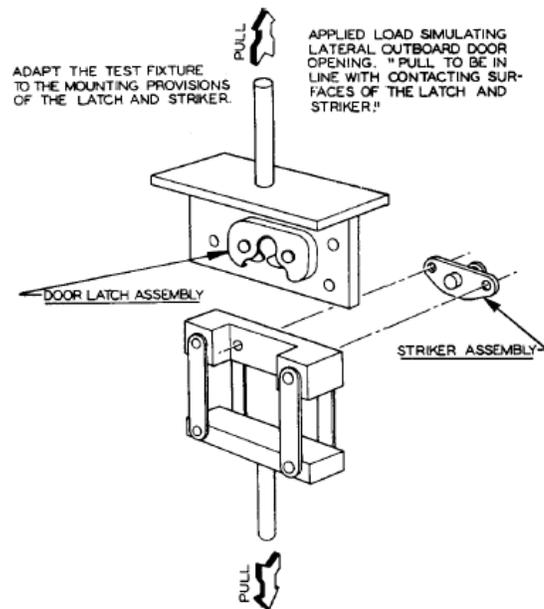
Door Latch – Tensile Testing Fixture for Load Test 2
